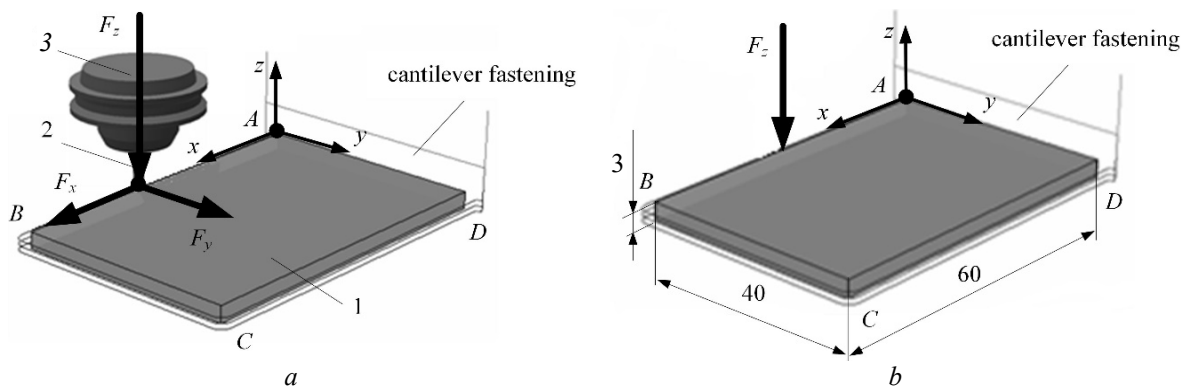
Simulation of the milling process of a cantilever thin-walled plate: the “part – tool – machine” system (a); calculation scheme (b)
